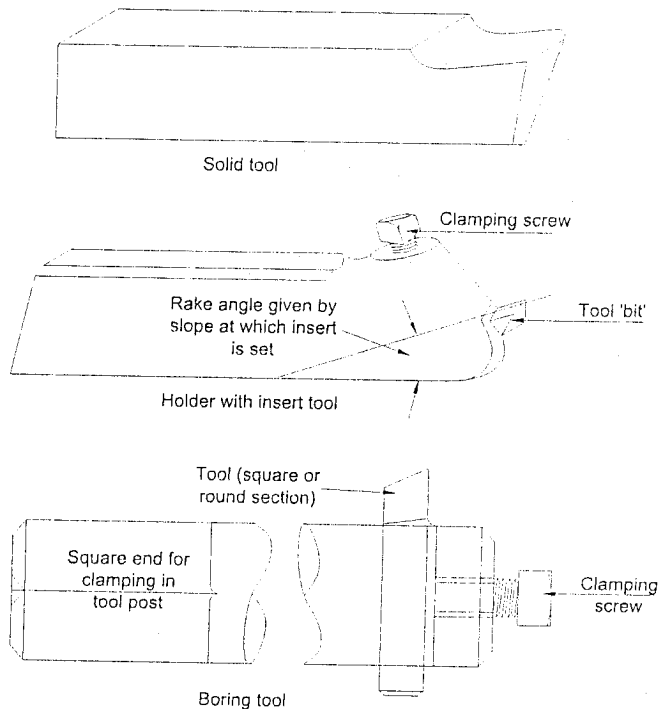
Single-point cutting tools (Chapman, 1986)
